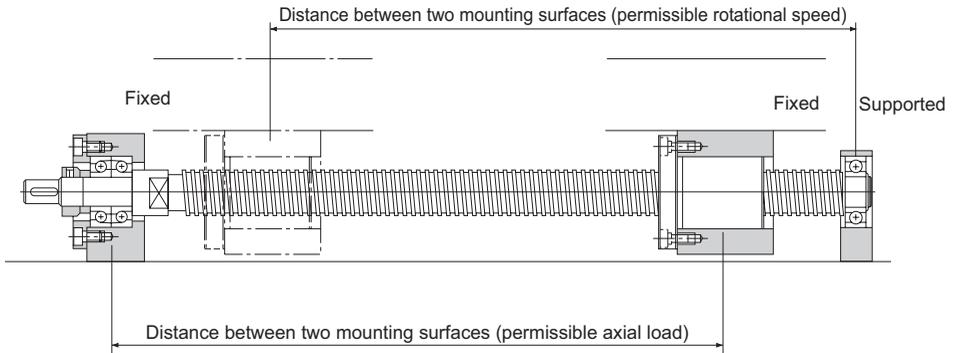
Screw Shaft Mounting Method: Fixed - Supported
